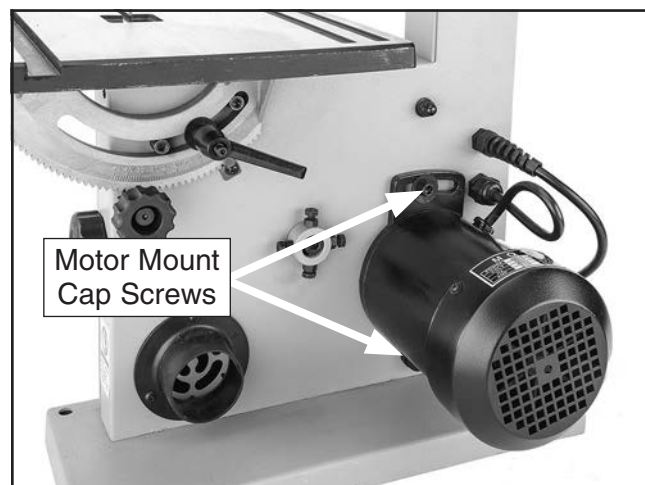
Location of motor mount cap screws used for adjusting belt tension.
